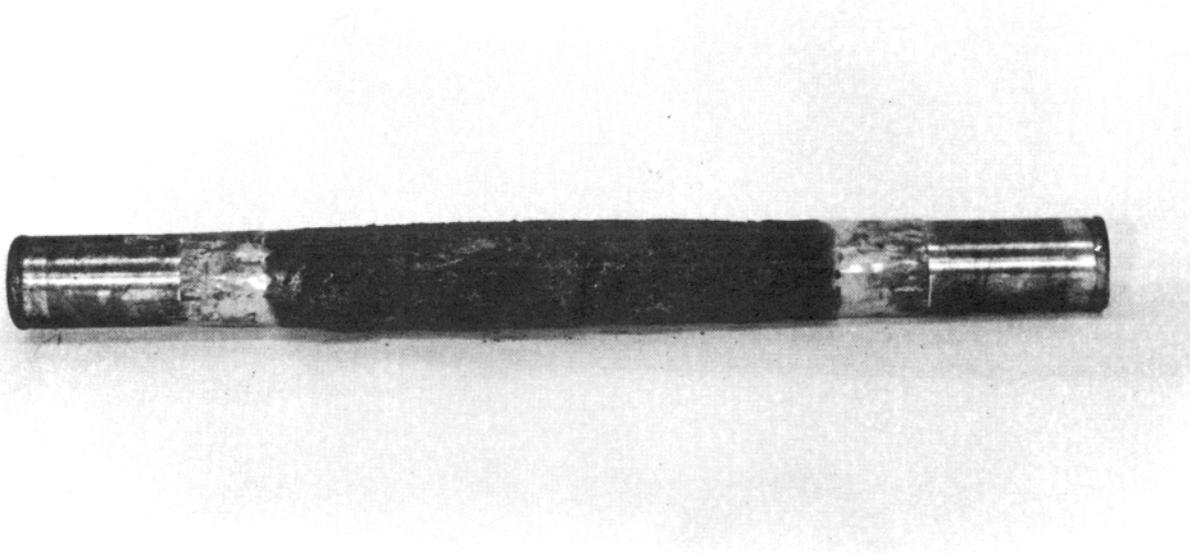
TYPICAL OCEAN 47135 COATED ALUMINUM TUBE AFTER TEST IN DRY BAY FIXTURE
